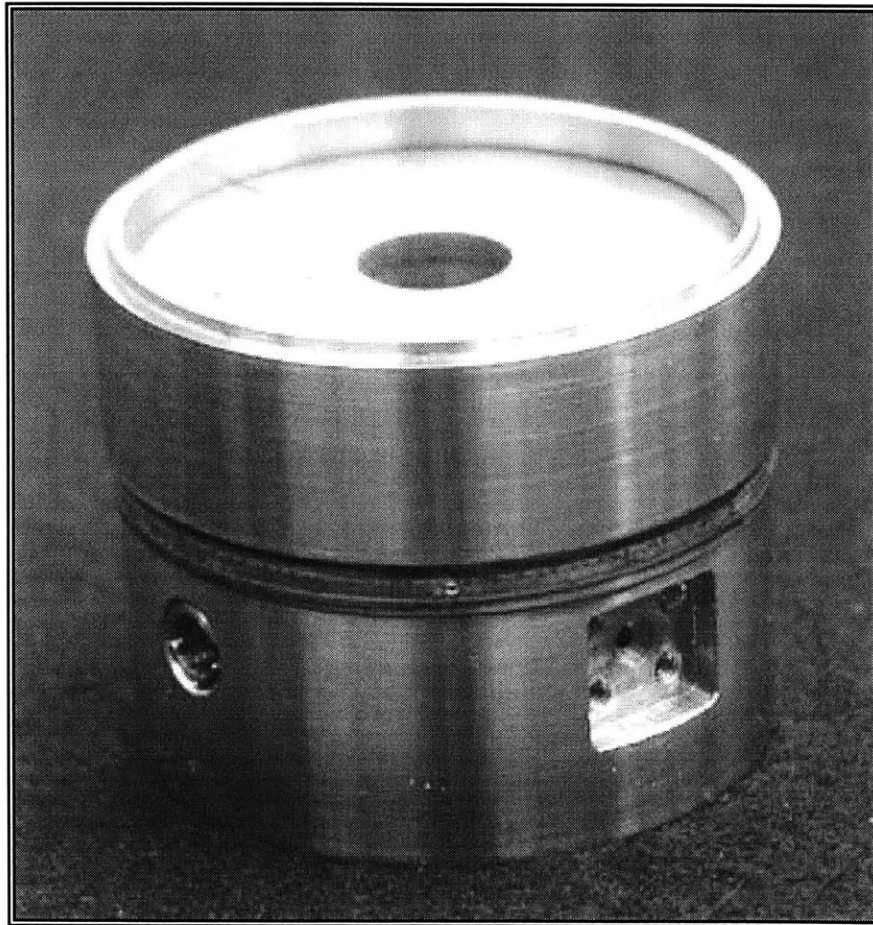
The high-pressure assembly consists of the inlet valve sandwiched between two welded pieces
